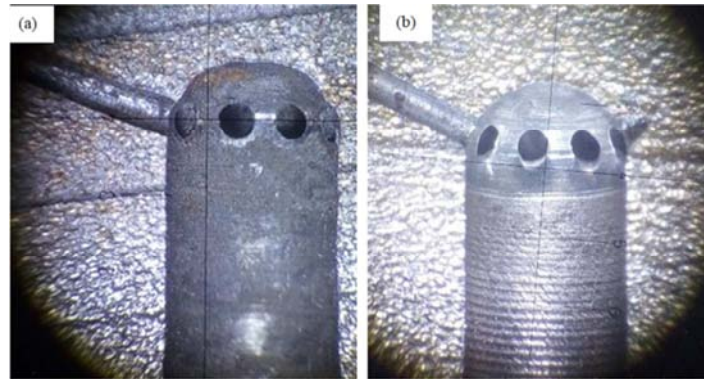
Images of the nozzle spray holes before (a) and after (b) extrusion grinding.
